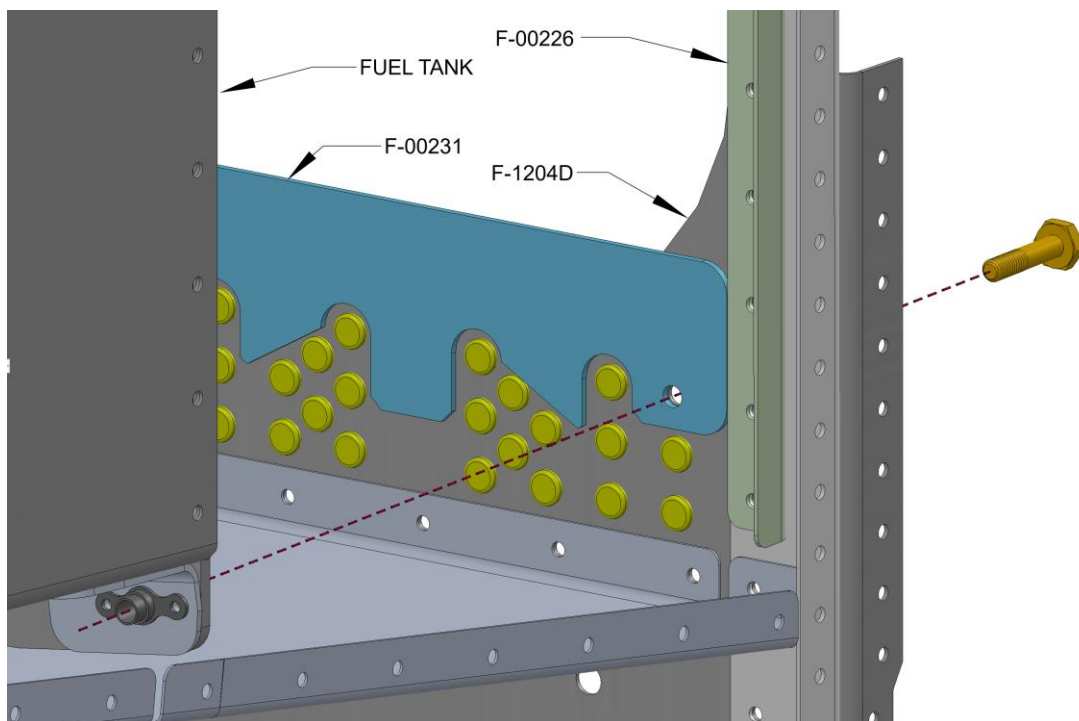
INSTALLING THE FUEL TANK SPACER.
